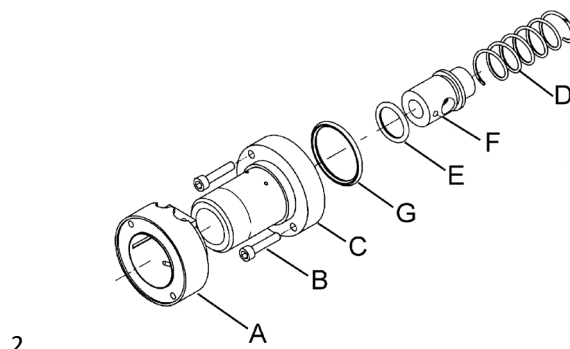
Valve seal replacement – AGS (East and Zeus)
